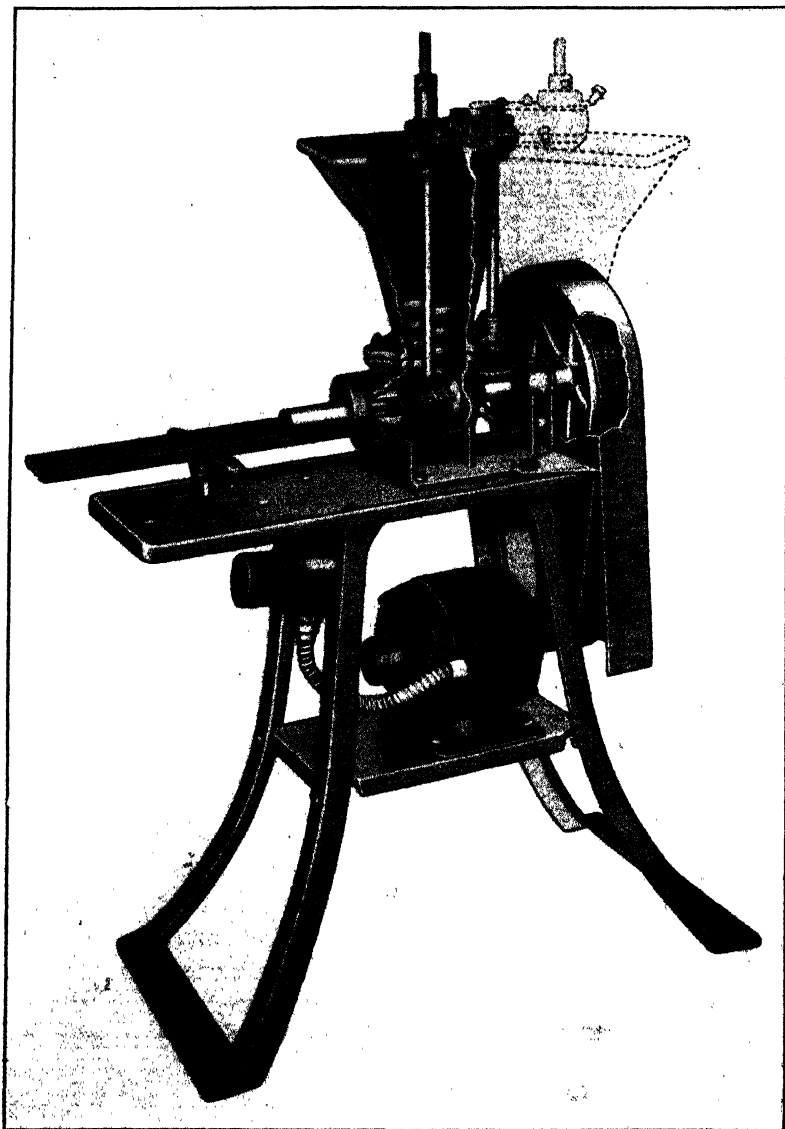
Stock core-making machine. (Courtesy of Wadsworth Equipment Co., Akron, Ohio.)
